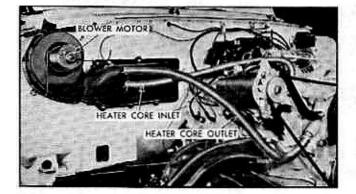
Direct-Aire Heater Air Inlet Duct Assembly on Dash Shroud
